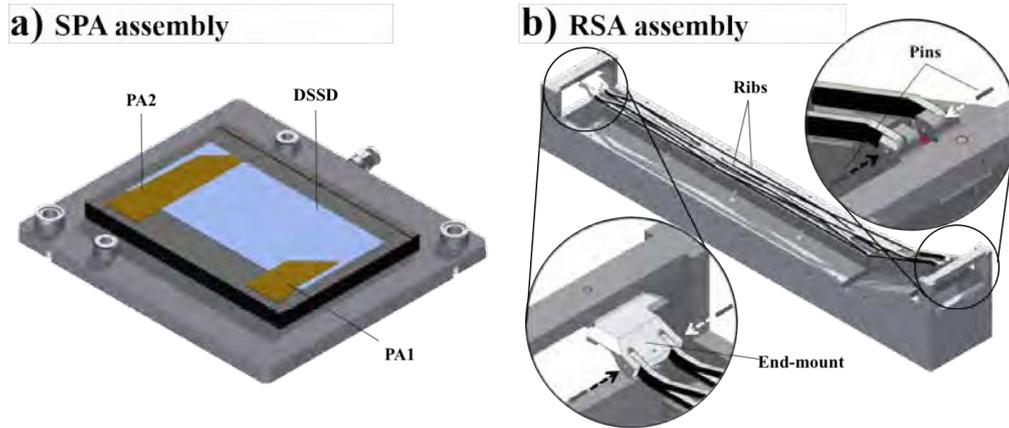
a) SPA assembly and components. b) RSA assembly and components.
